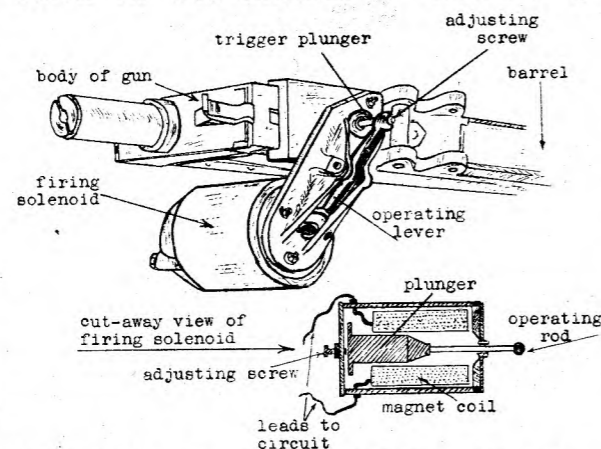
Gun-firing solenoid attached to aircraft gun showing how the magnetic pull of the coil operates the gun trigger by pressure.
